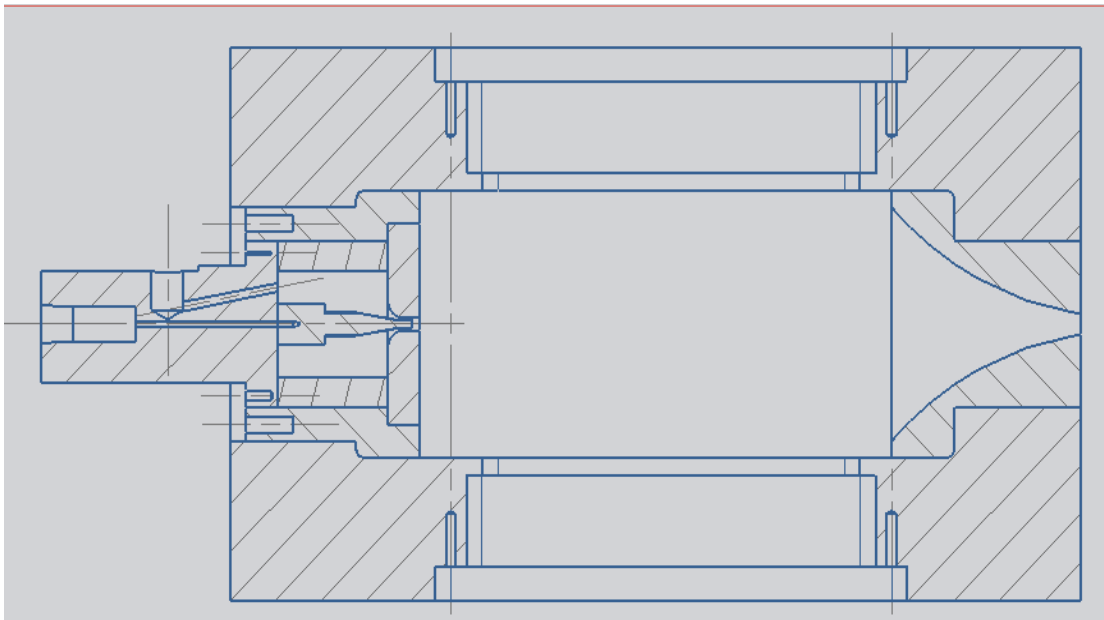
MOAC Chamber Cut away. Coaxial injector shown installed
